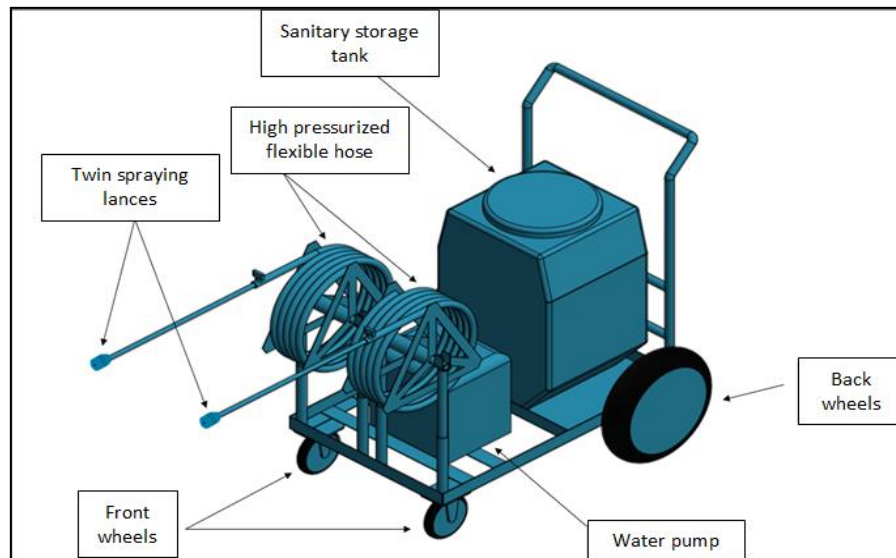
Three-dimensional overall drawings for the Twin Spray Sanitation Machine (TSSM)
